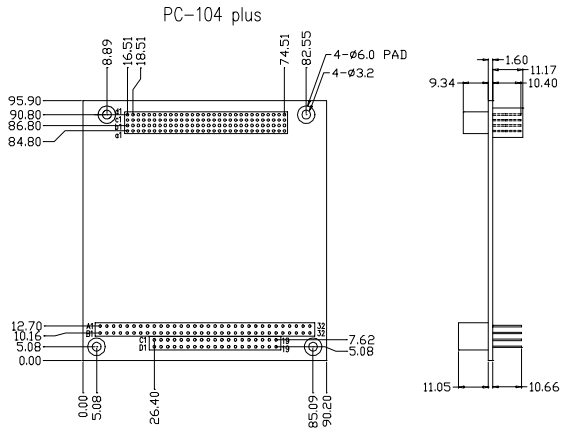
PC/104+ module dimensions (mm) (± 0.1)
